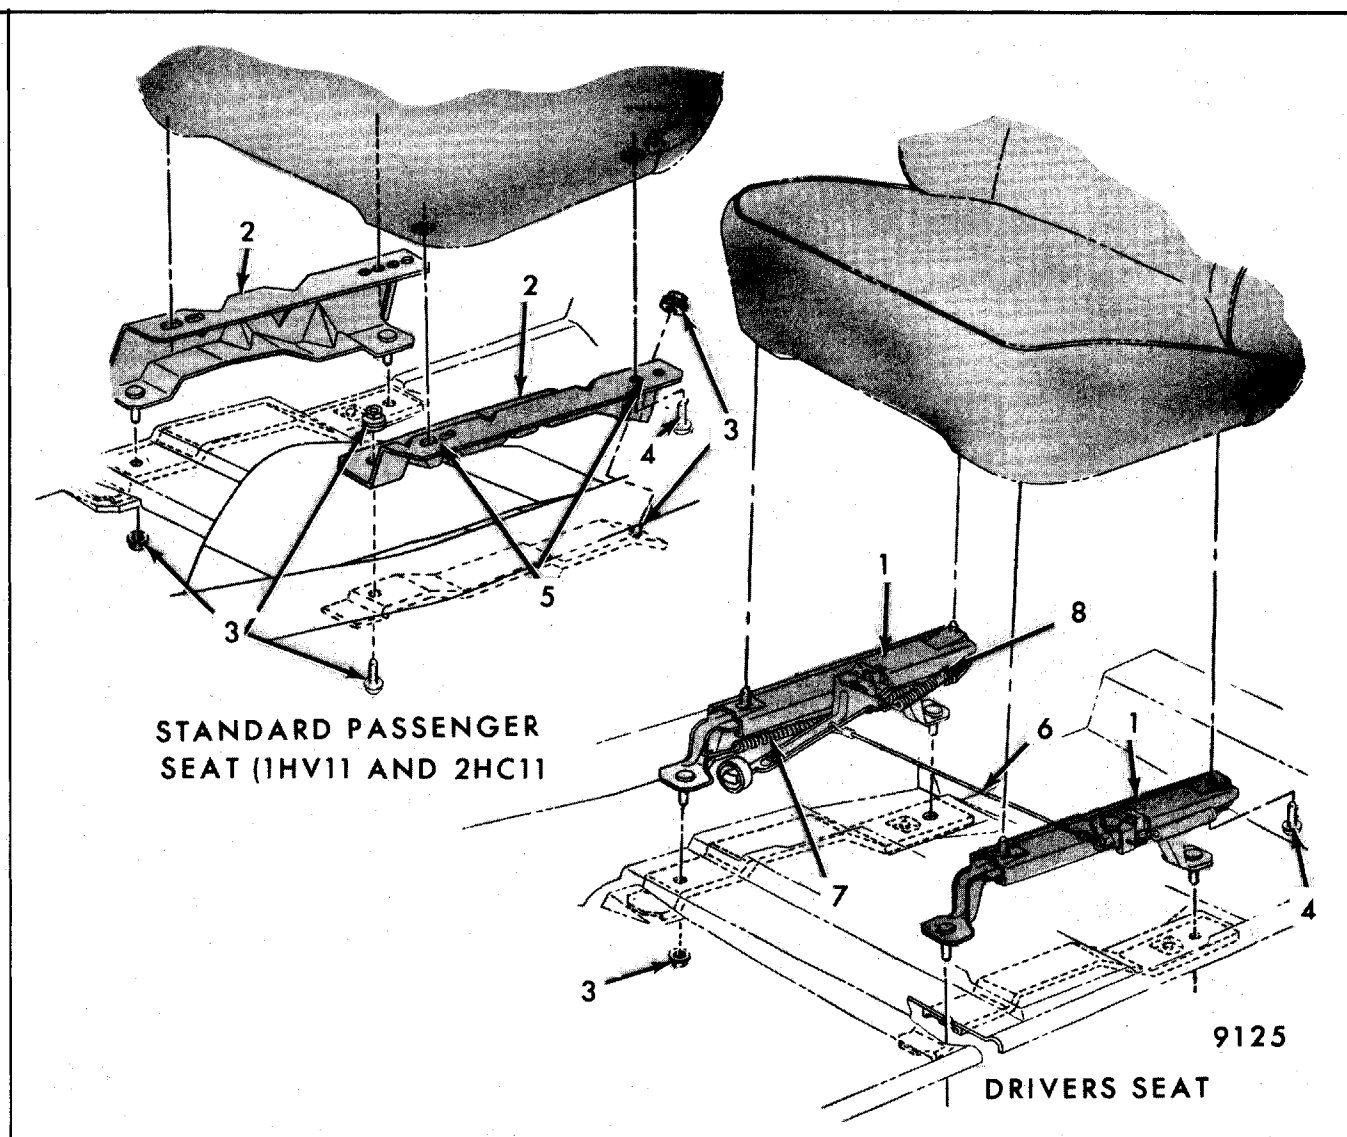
"H" Body "11" Series Bucket Seats and Adjusters
